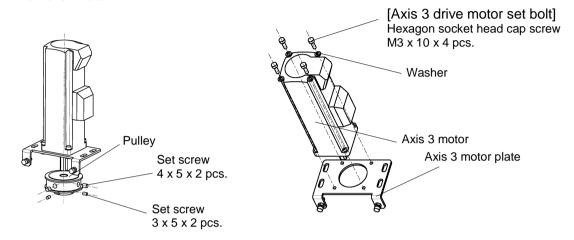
Dismounting axis 3 motor pulley and plate (KHL-300, KHL-400)
